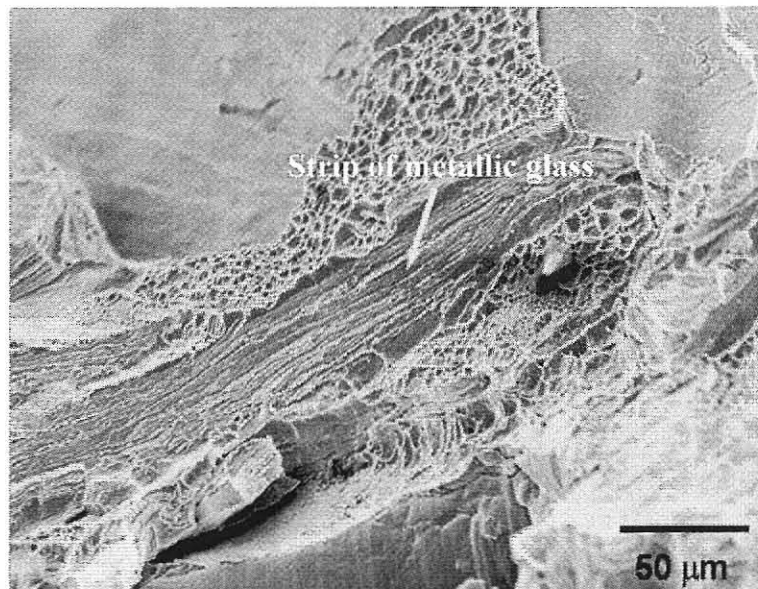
SEM images showing the tensile fracture surface of the BMG/Cu joint (400rpm, 100mm/min).
